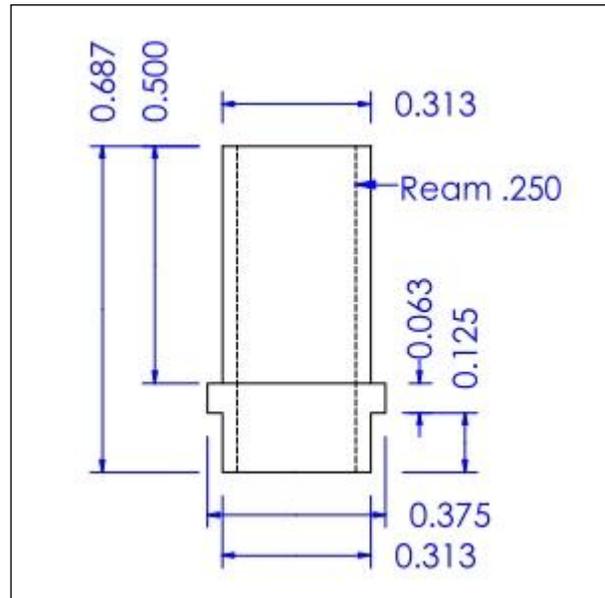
Construction drawing for the bridge pipe. Material is $\frac{3}{8}$ " brass rod.
